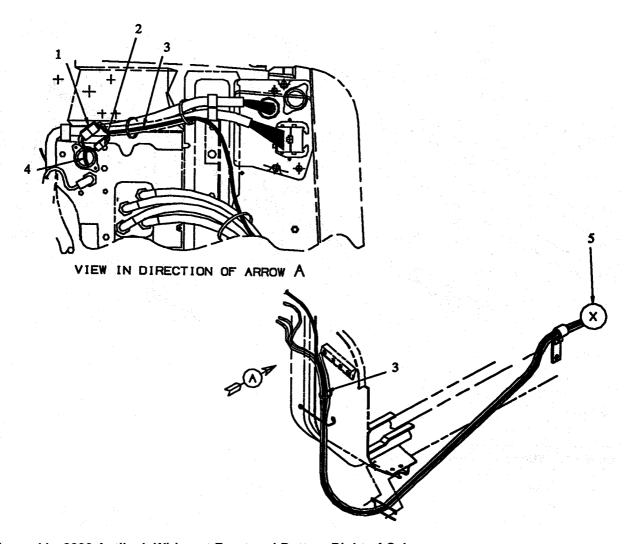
8000 Antilock Wiring at Front and Bottom Right of Cab
